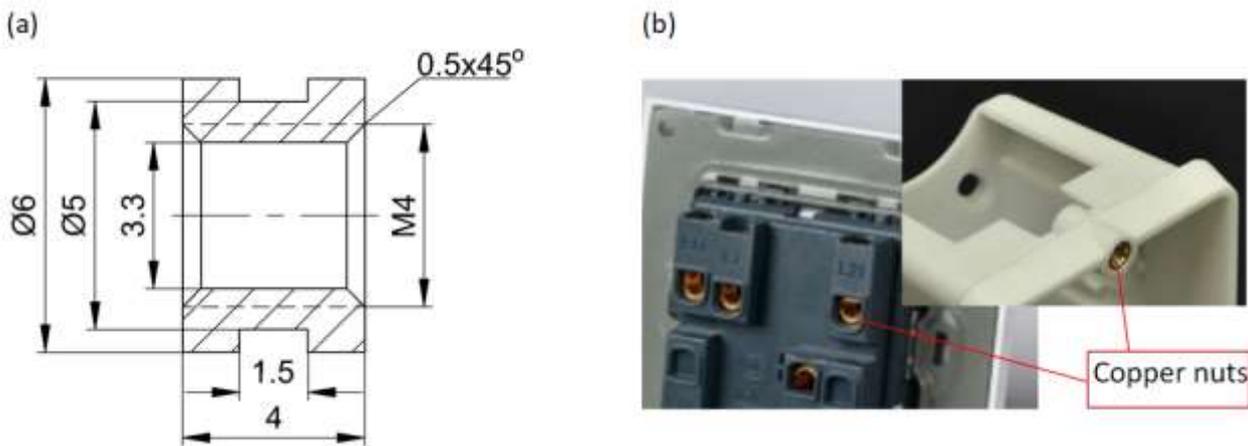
The workpiece to be threaded: a) a section drawing and (b) application examples
